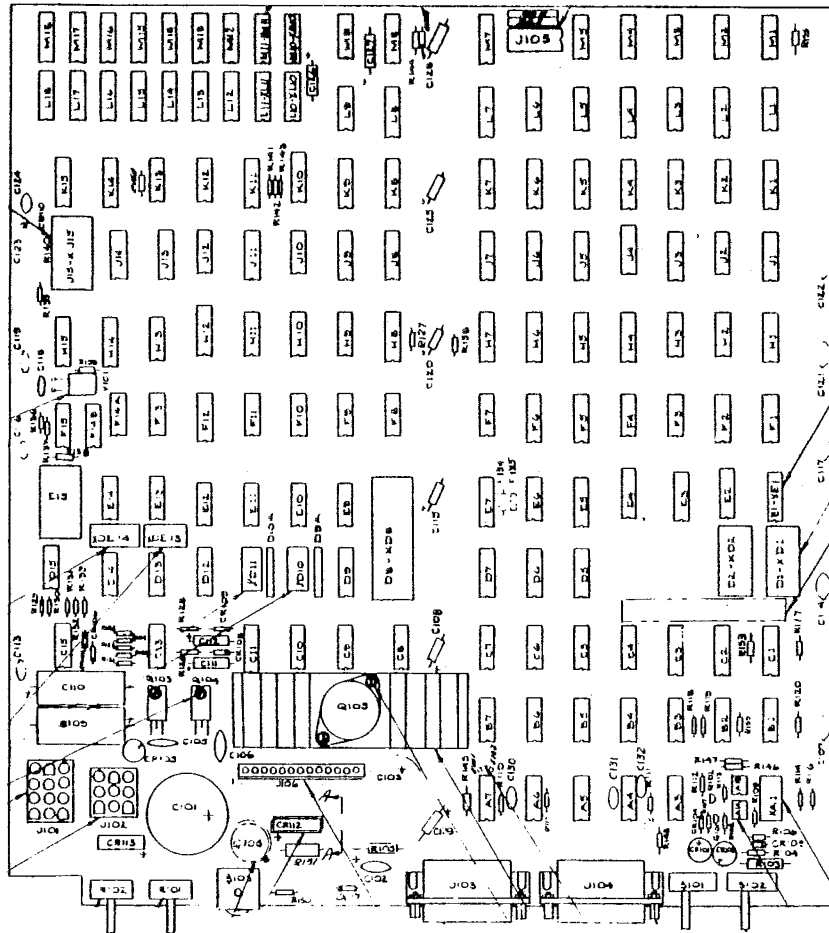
ASSEMBLY DRAWING (B150)
